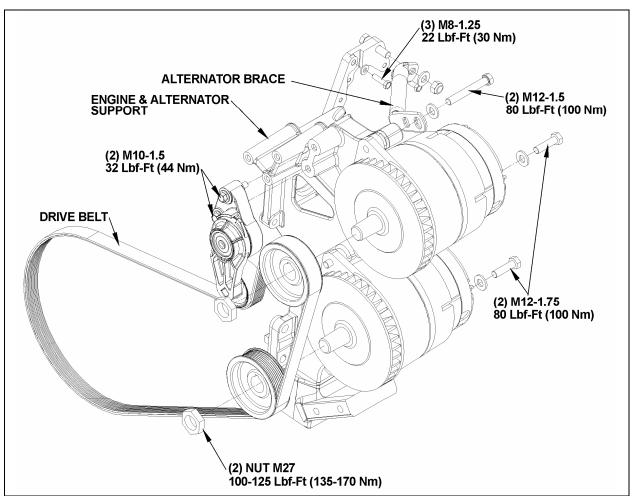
BOSCH ALTERNATORS MOUNTING TORQUES (VOLVO D13)
